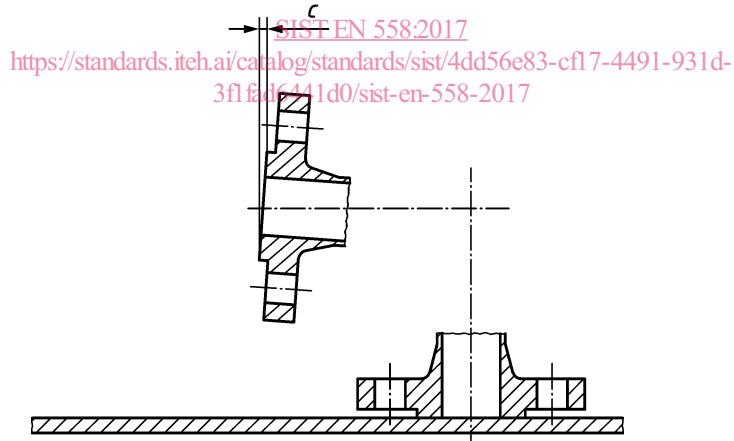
Tolerances on parallelism and perpendicularity
